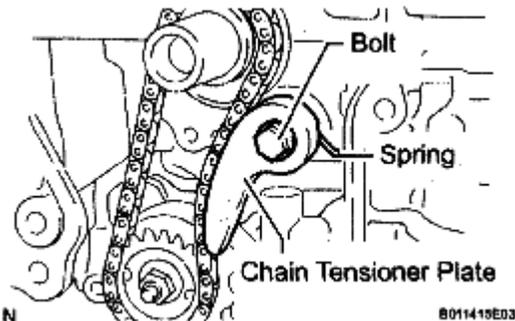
Identifying Bolt, Chain Tensioner Plate And Spring
